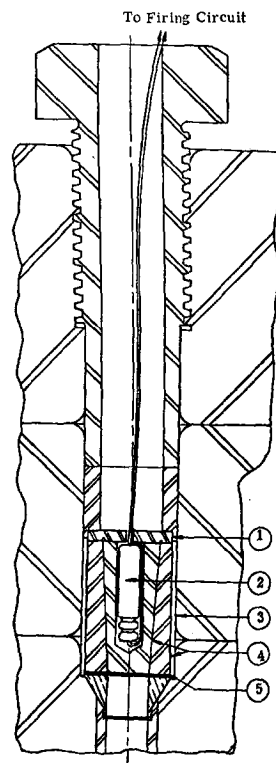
Valve configuration. 1—Outer diaphragm (4340 R_e 30 steel); 2—No. 6 blasting cap; 3—1½ mm paper wrapping; 4—valve assembly (4340 R_e 30 steel) (taper ~3¼°, 3.81 cm long); 5—inner diaphragm (exposed to chamber gas).
